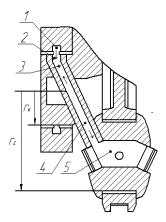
Diagram of the oil feed to the connecting rod bearings: r_k – radius of the crankshaft main journal, r_c – rotation radius of the outlet holes in the connecting rod bearing (crank), 1 – annular groove, 2 – channel in the crankshaft main journal, 3 – inlet channel for feeding the crankshaft main journal, 4 – feed channel, 5 – rod cavity.
